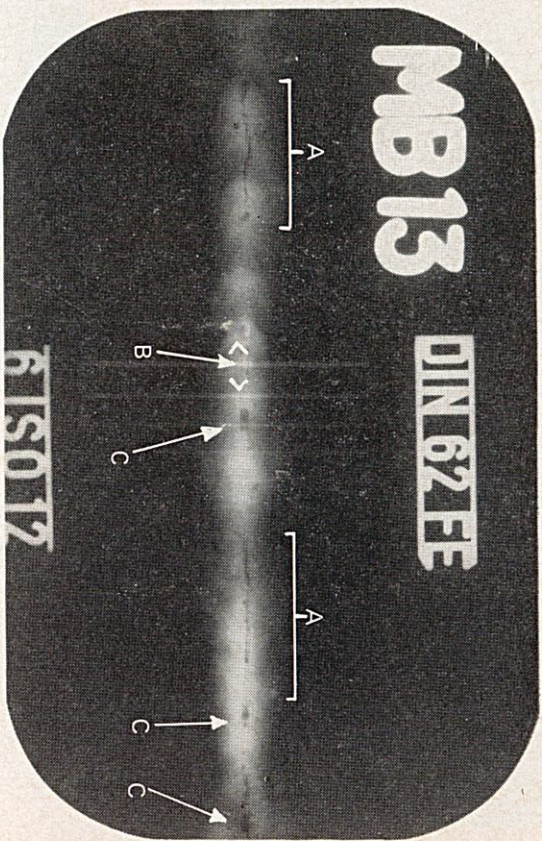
Radiograph of manual arc butt weld in 3/8 in. mild steel plate showing the following defects: (A) Longitudinal cracks in root of weld. (B) Lack of root fusion (on one side of the vertical face or land of weld preparation). (C) Incomplete root penetration.
